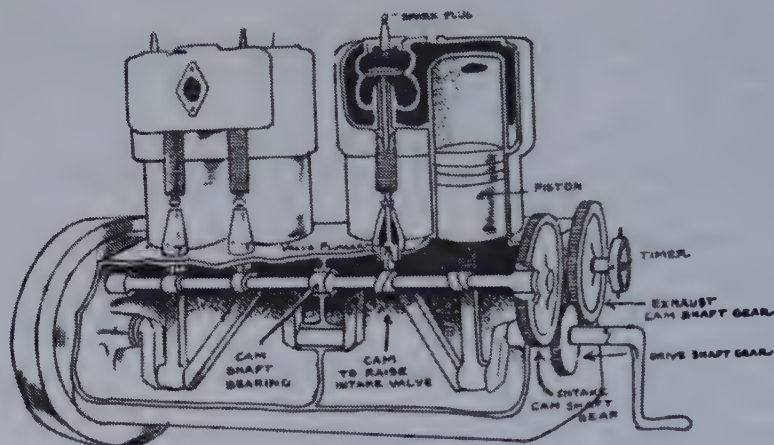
Side view of a Four Cylinder Engine with several parts omitted in order to clearly explain how the "Cam Shaft" and "Cams" operate.
